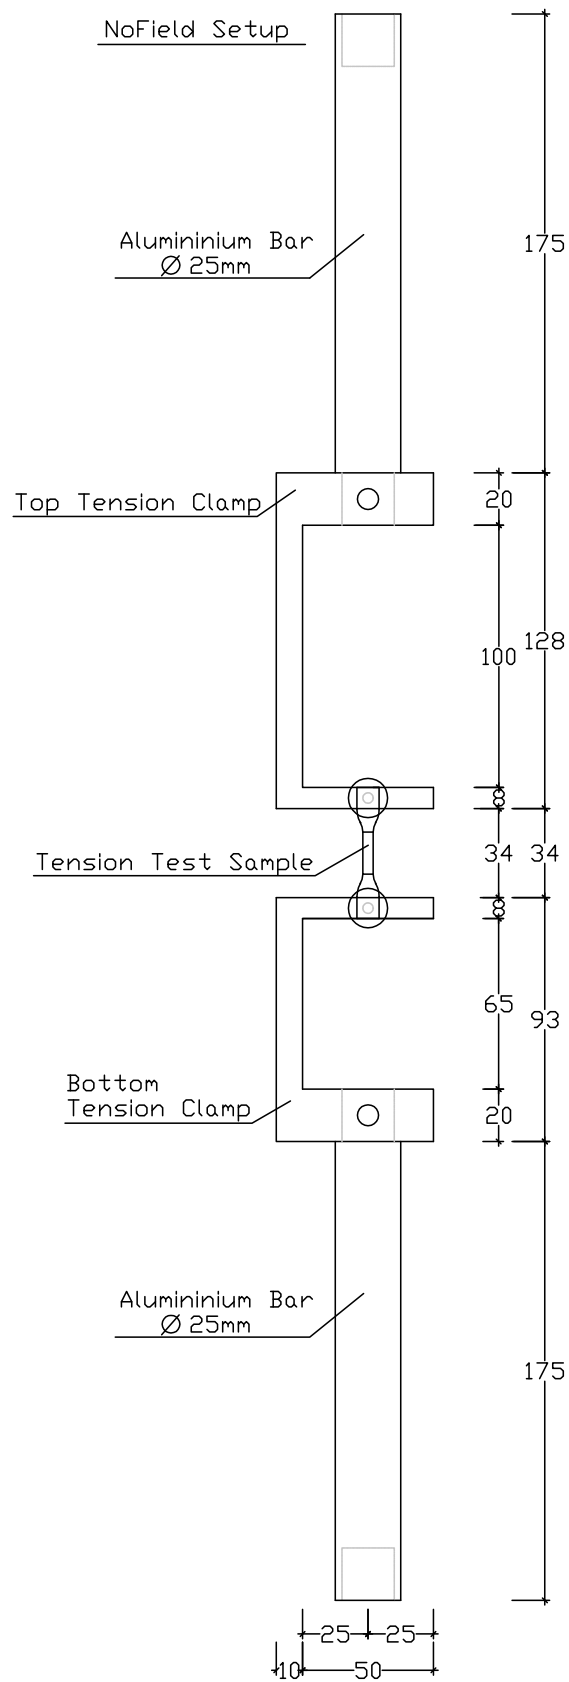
Technical drawing of the bottom part of the rig structure used for tension and pure shear tests.
